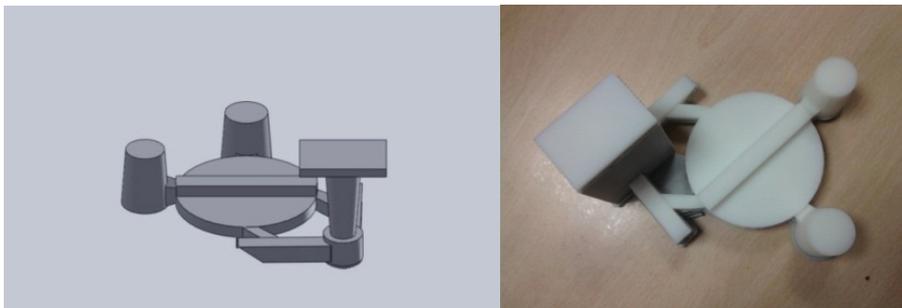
CAD Model of modified Pattern (left), Pattern for Investment Casting (right)
